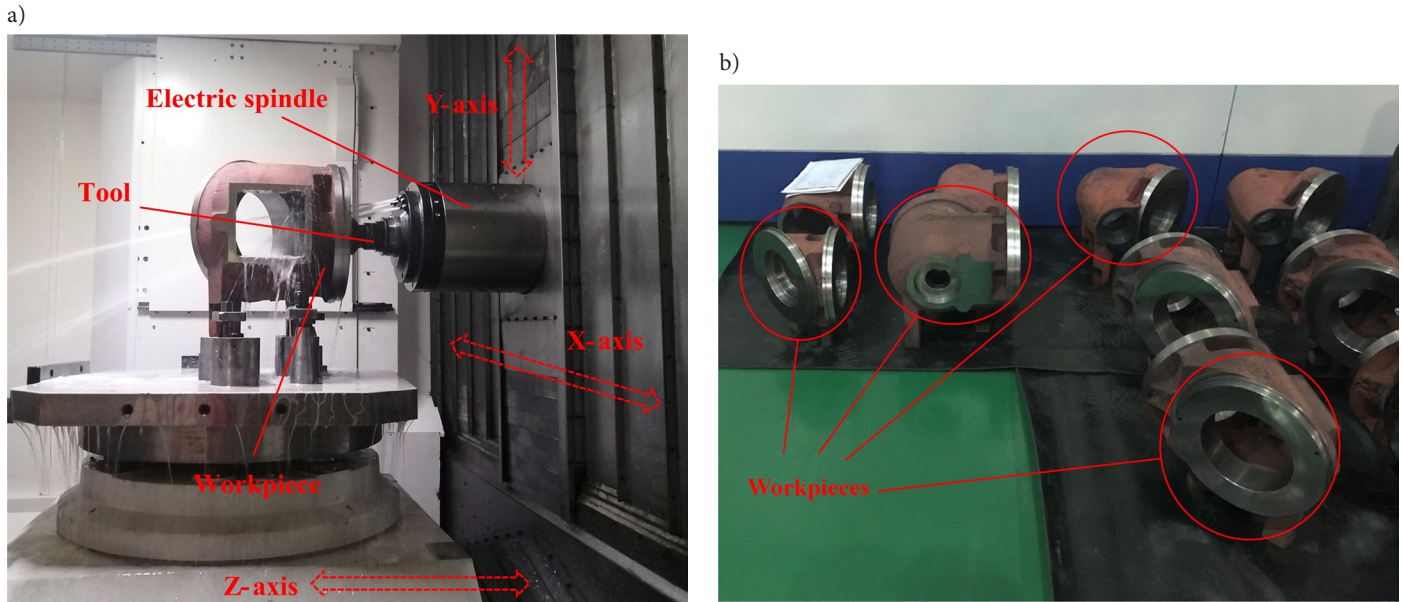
The machining process of the workpieces: a) the machining process of a workpiece, b) various workpieces
